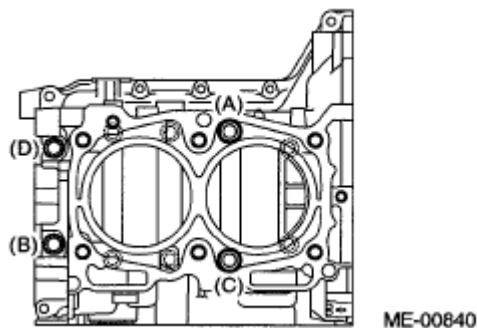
Identifying 10 mm Cylinder Block Connecting Bolts Tightening Alphabetical Order
